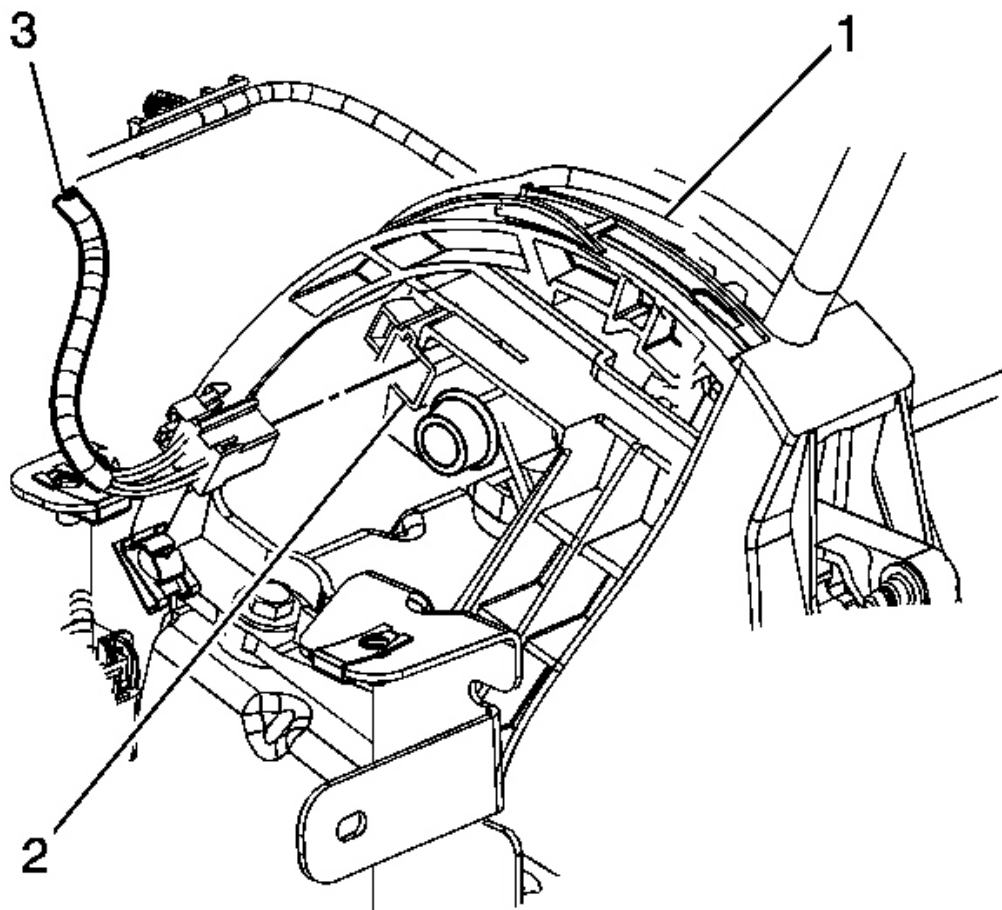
View Of Shift Lock Actuator Electrical Connector
